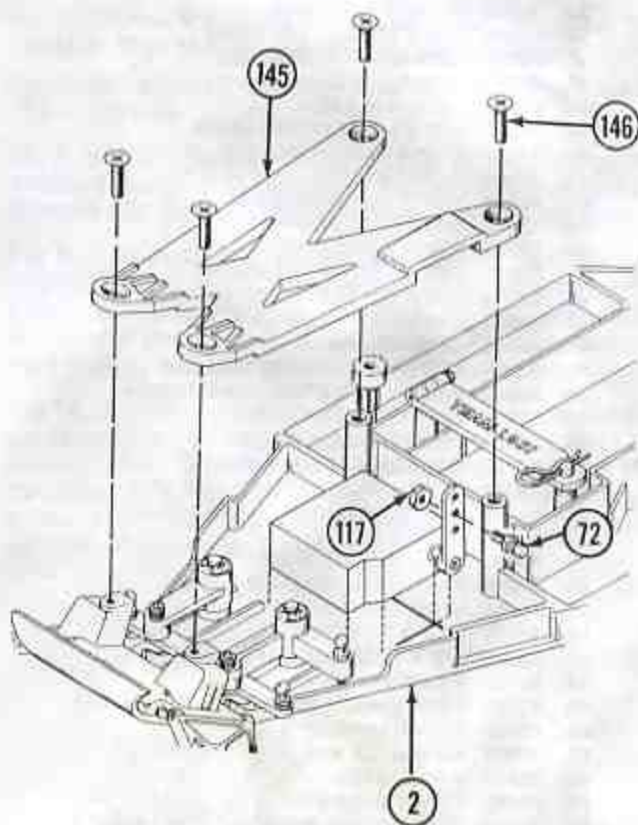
Attach steering servo using servo tape (53) to front of chassis (2) as shown. Thread an adjustable rod end (70) onto both sides of 1 1/2" threaded rod (119). Thread one 3/16" studded ball (72) into steering servo arm and secure with a 4-40 nut (117). Attach one end of 1 1/2" rod (119) onto studded ball (55) in steering bellcrank (75) and other end onto studded ball (72) in steering servo arm. Secure front stiffener (145) to chassis (2) using four 8-32 x 1/2" steel flathead screws (146).
